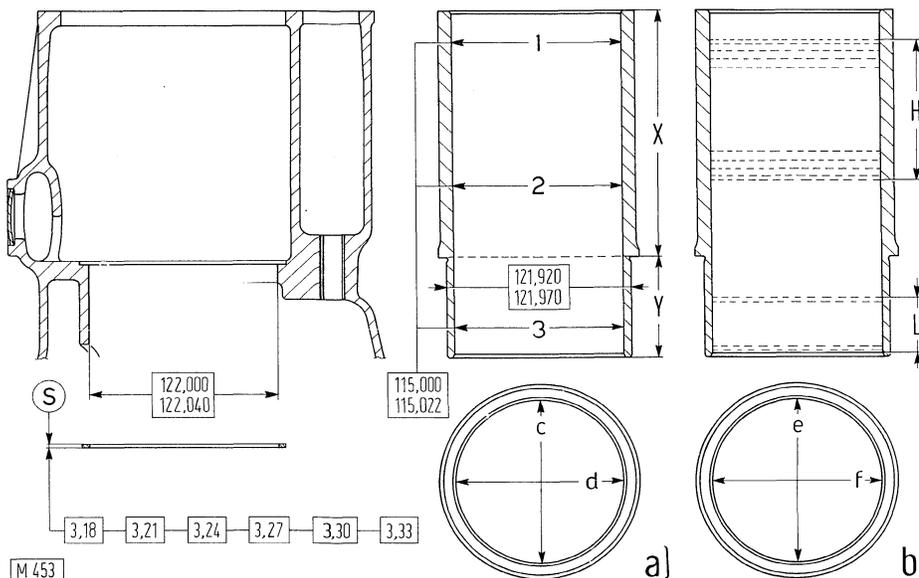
Sleeve and Block dimensions and wear Data
